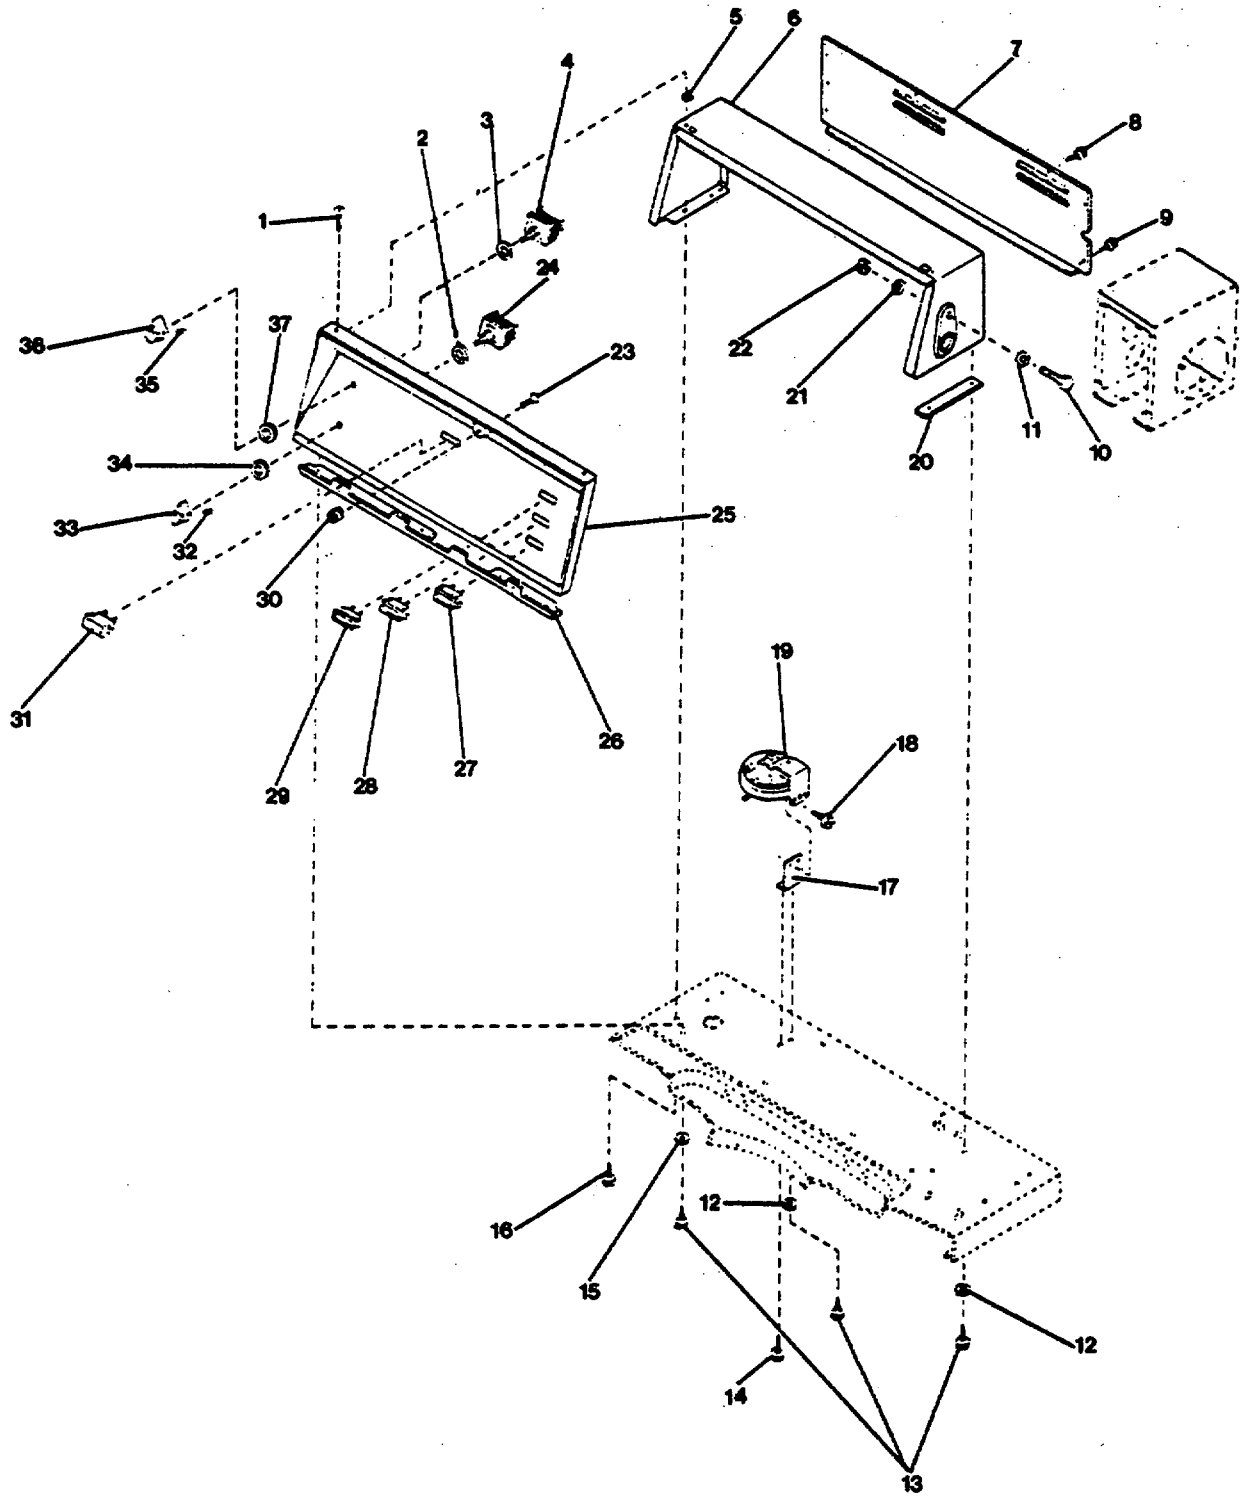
Washer Machine (Sheet 1 of 5).
